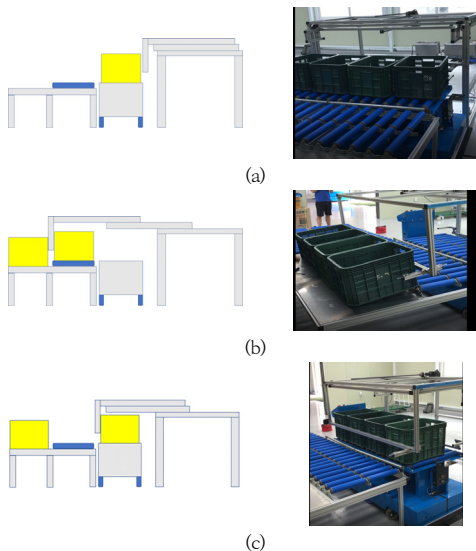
Loading and unloading machine movement (a) Step 1 (b) Step 2 (c) Step 3
